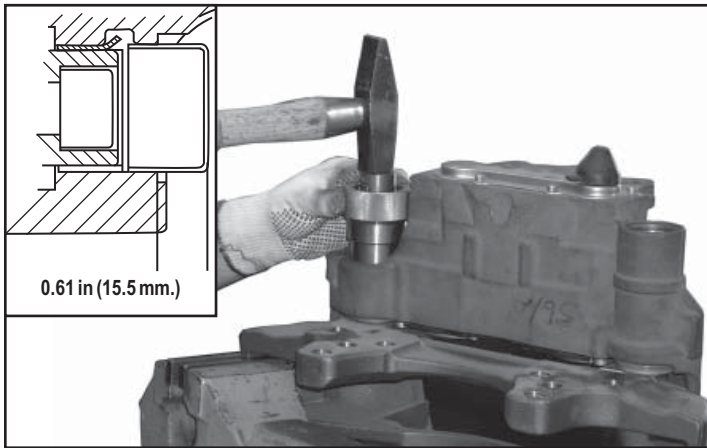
GUIDE CAP (4) INSTALLATION
